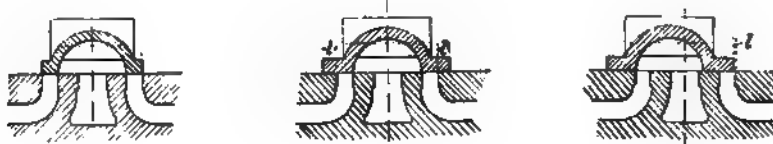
Valve without Lap. Fig. 62.—Valve with Lap. Fig. 63.—Valve open to Lead.
